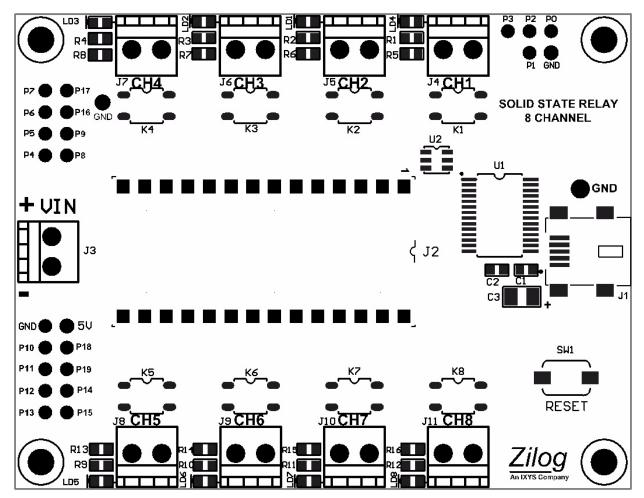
Mini-Z Solid State Relay Design Board Assembly Diagram
